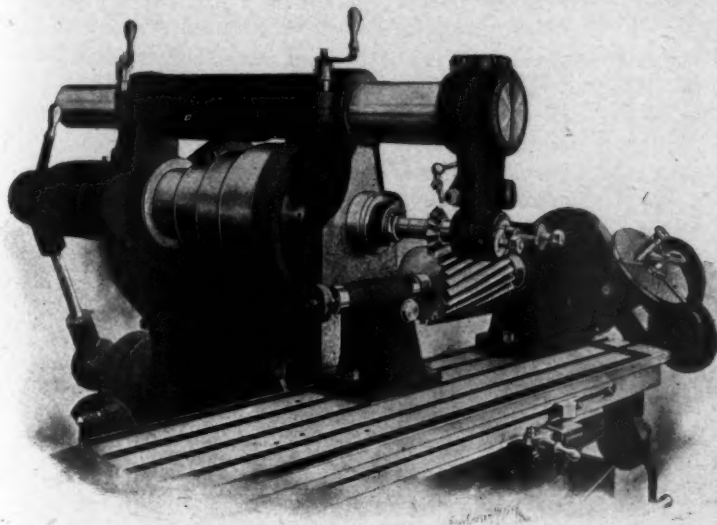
MILLING A HEAVY SPIRAL CUTTER.
